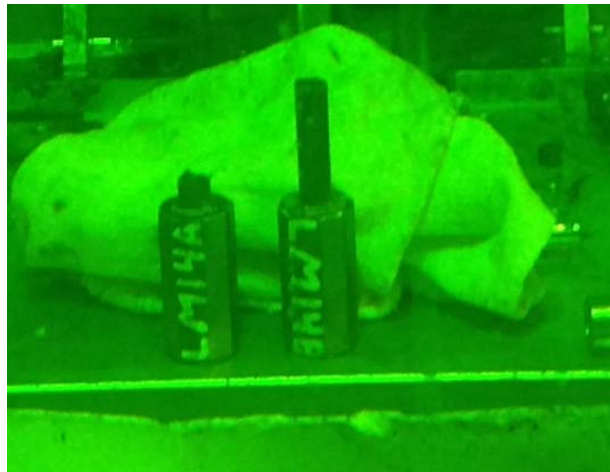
Failed specimen LMK14 showing that the failure occurred in the gage section.
